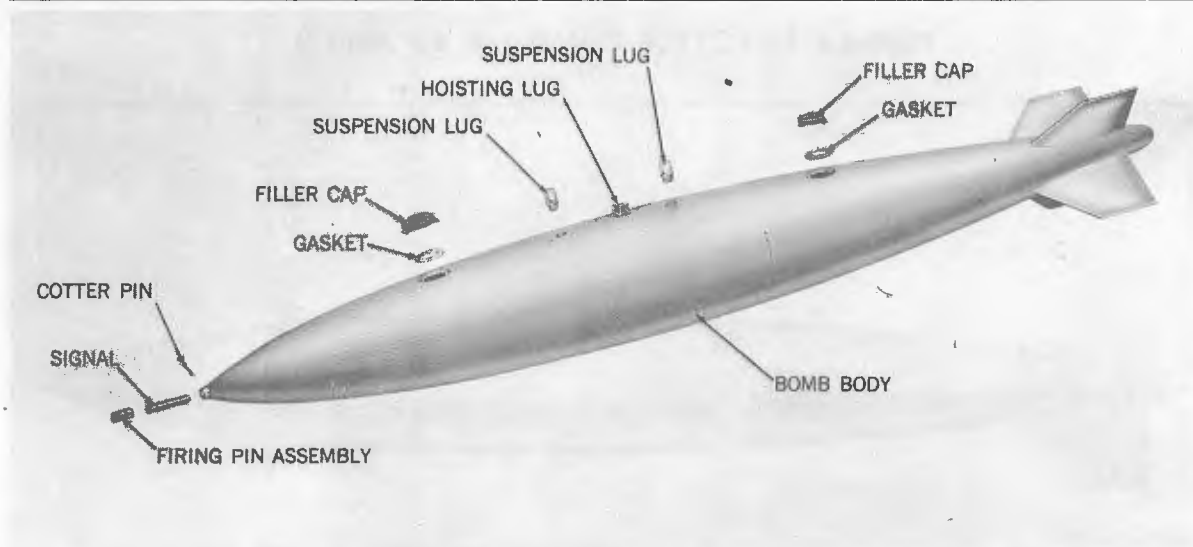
1000-lb Practice Bomb Mk 88 Mod 0, Exploded View.
